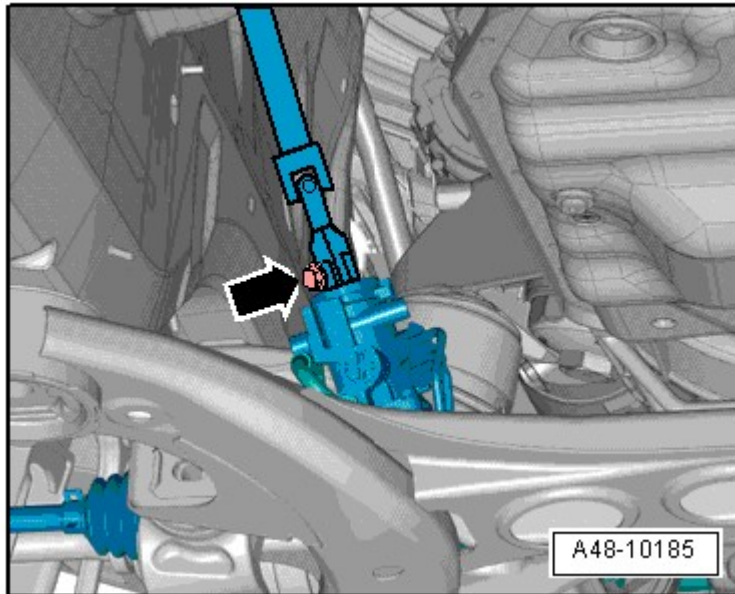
Identifying Universal Joint Bolt -Arrow-
